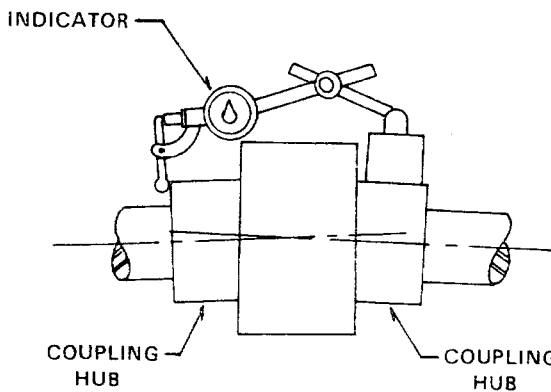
TESTING ANGULAR ALIGNMENT OF MOTOR AND GENERATOR SHAFTS FOLLOWING COUPLING INSTALLATION
